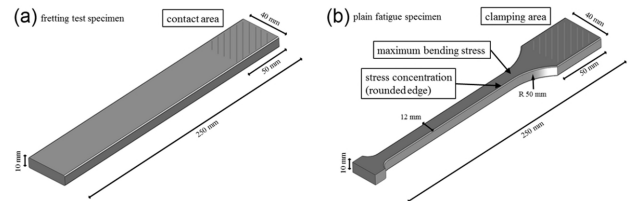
Fretting test specimen (a) and the plain fatigue specimen (b).
